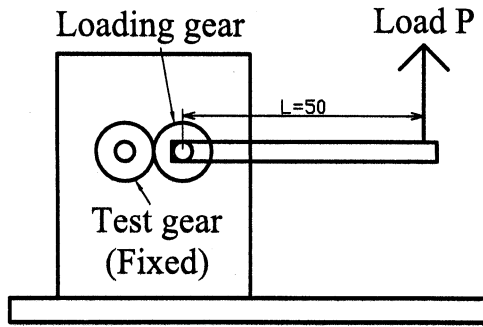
Device to measure dedendum bending strength using principle of leverage.
